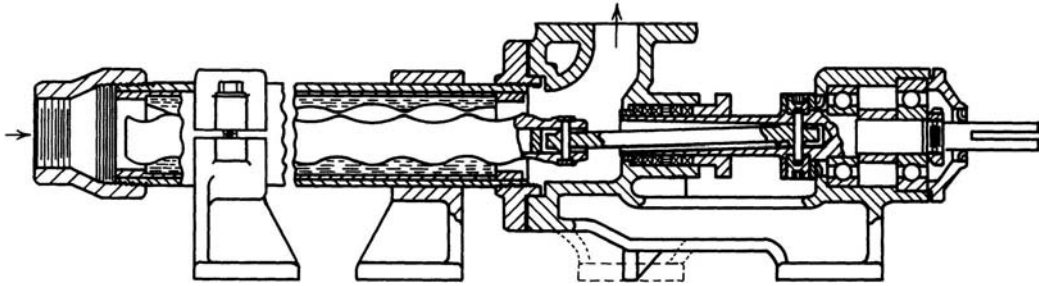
Single-rotor screw pump with an elastomeric lining. (Courtesy of Moyno Pump Division, Robbins & Myers, Inc.)
